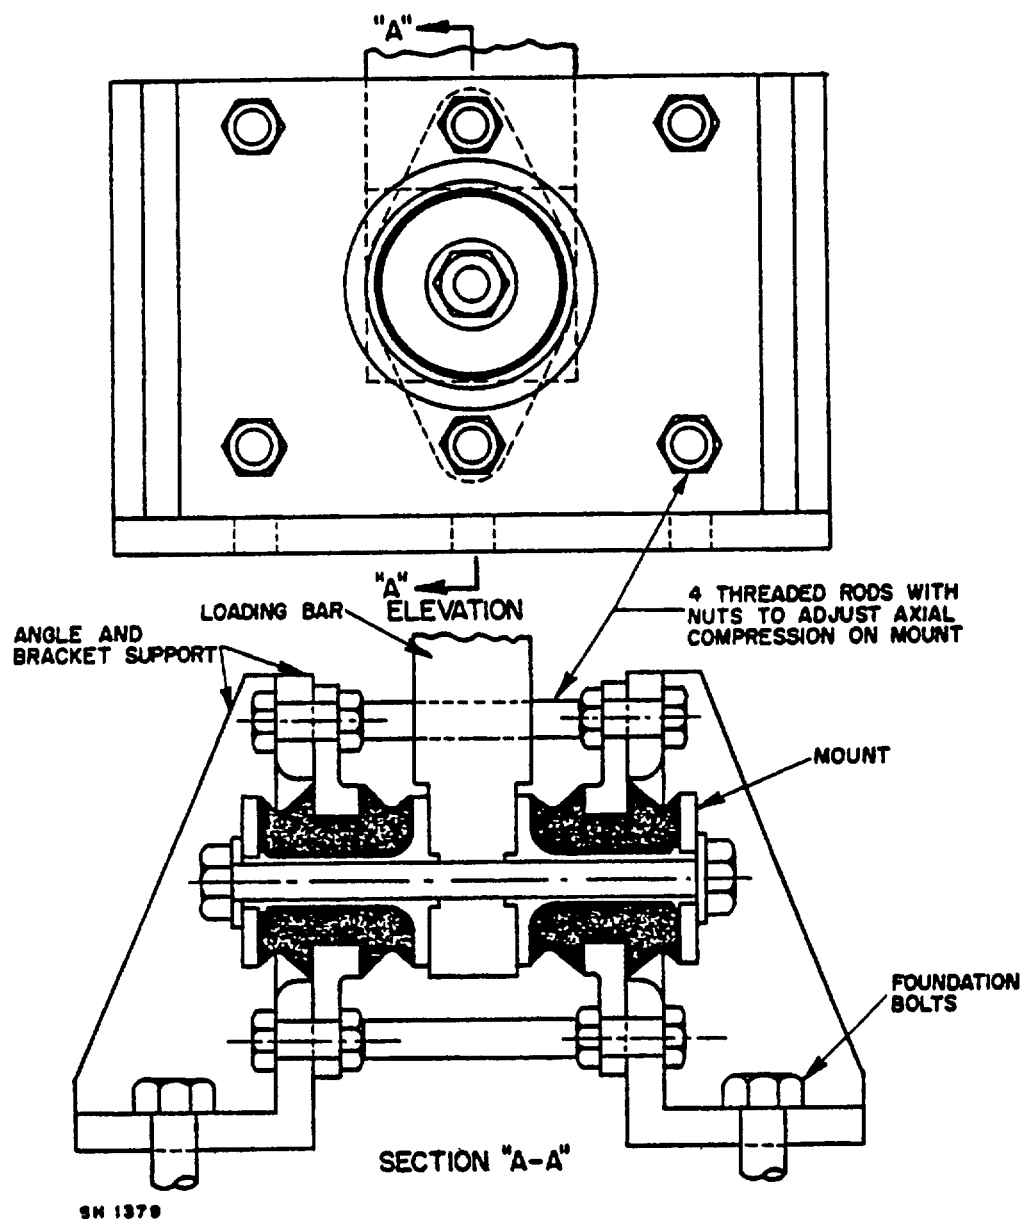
Jig for holding mounts when conducting static load deflection tests in the radial direction.
